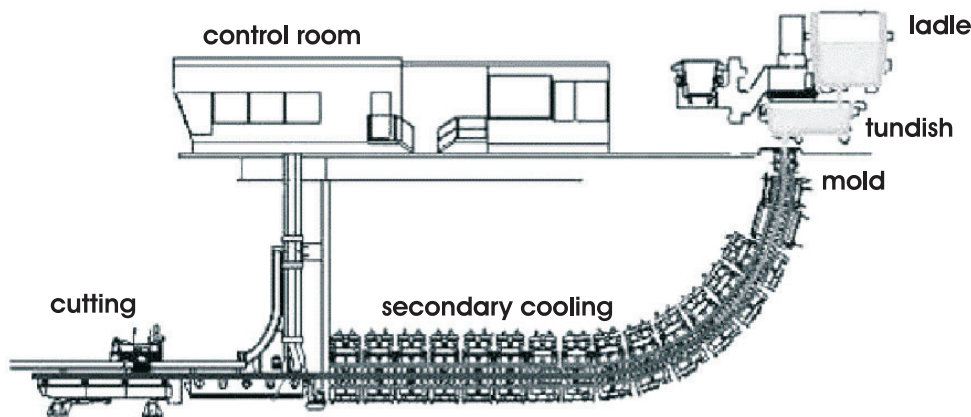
An industrial continuous casting machine. Photo courtesy of the Rukki Steel, Finland.
